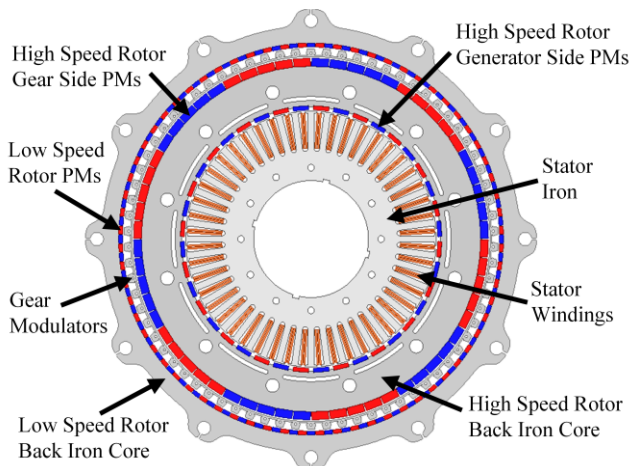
Cross-sectional view of the IS-RFMGM prototype.
